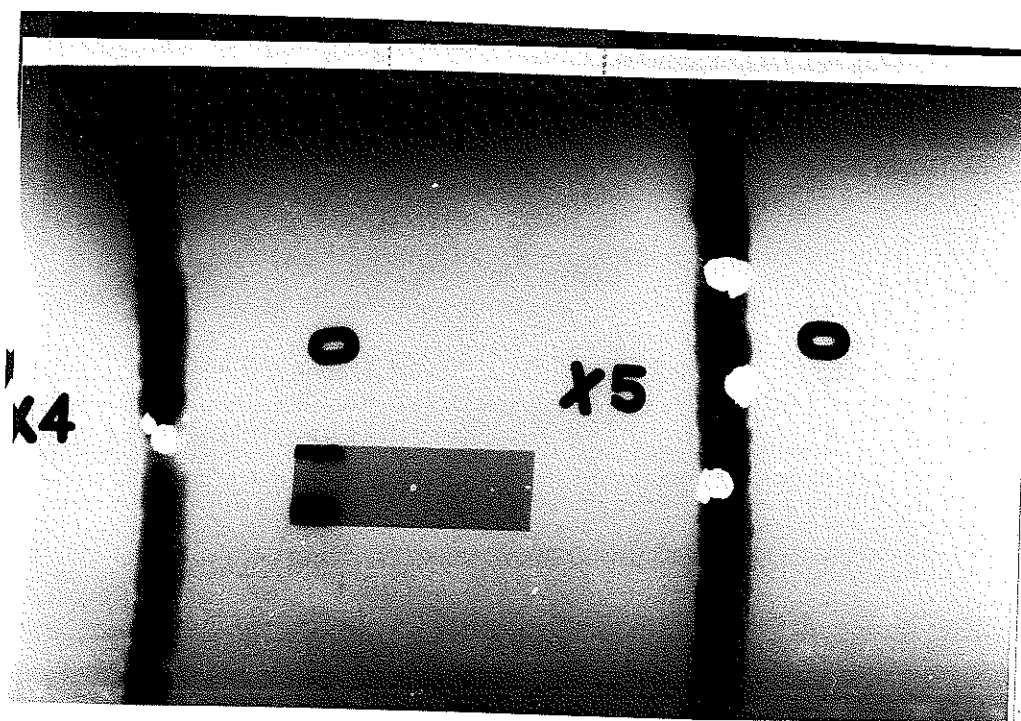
Photograph of radiograph showing pits to two welds.
